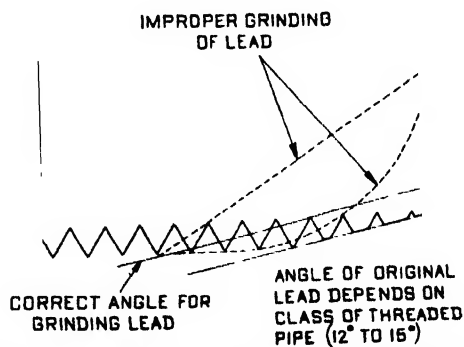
Sketch showing correct angle for re-grinding lead of chasers.
